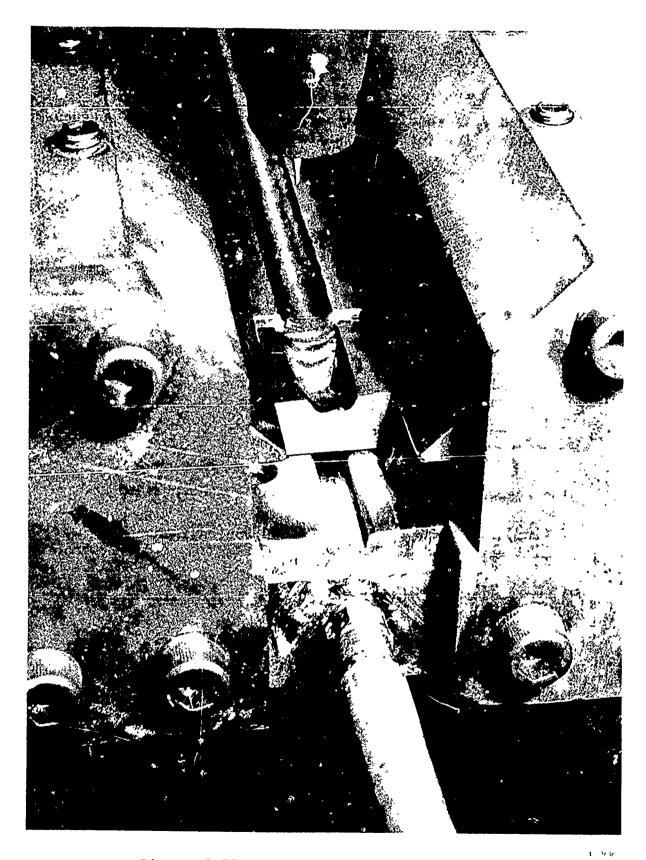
SETUP FOR USING WELD TABS
